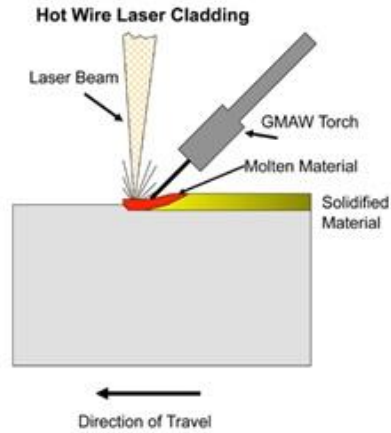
Position of weld equipment in Hot Wire Laser Cladding [63]
